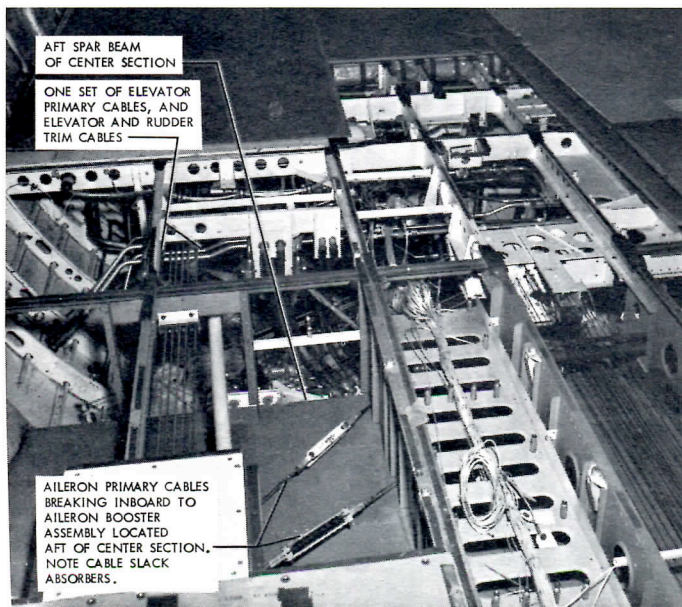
View Looking Aft Showing Cable Runs Below Cabin Floor and Over Center Section
